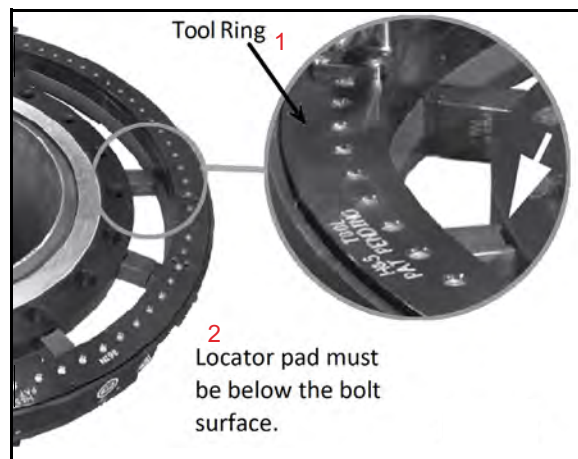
TOOL RING AND LOCATER PAD LOCATION
